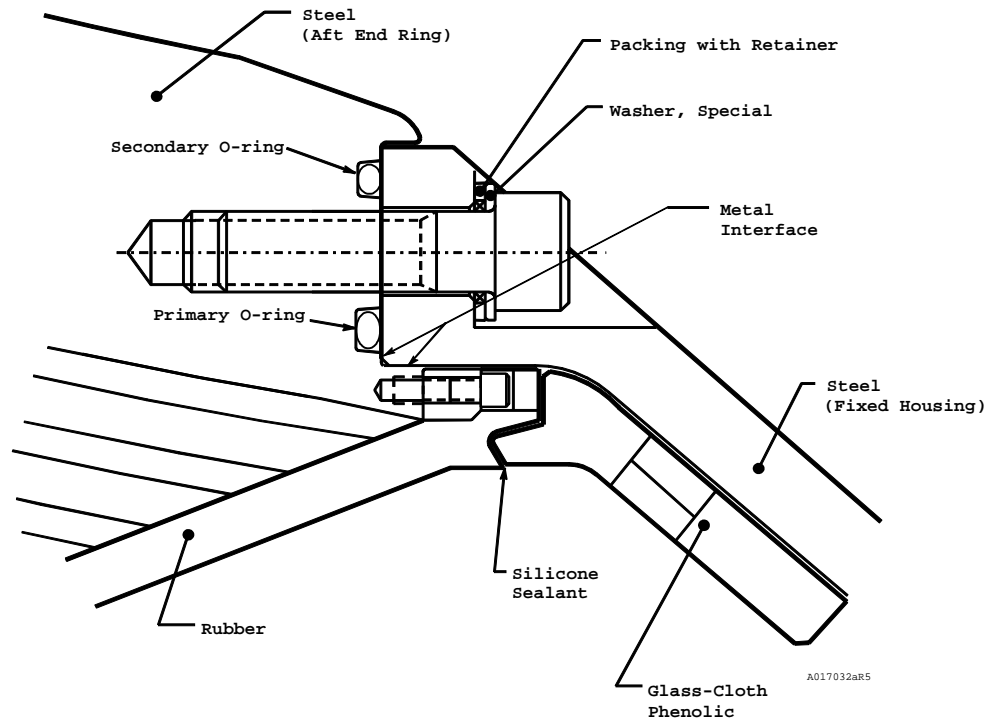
Fixed Housing-to-Aft End Ring Joint, Sealing Compound
